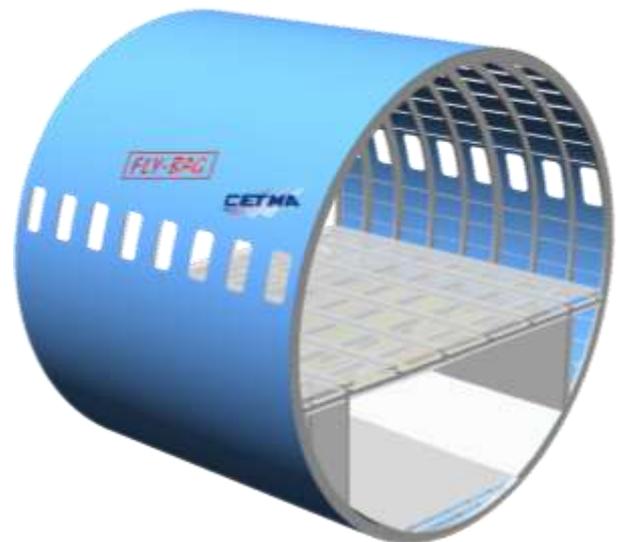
FR24 - FR35 forward fuselage section 13-14
